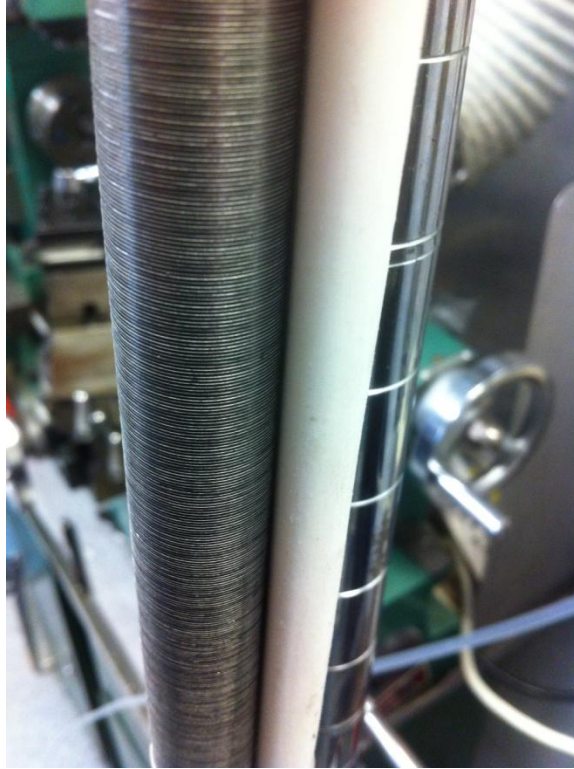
Half-length 3/4" evaporator and channel feed tube in open test configuration.
